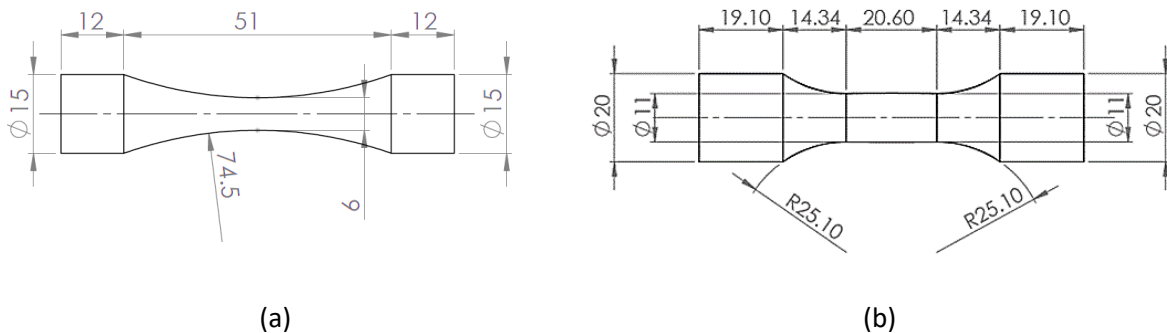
Geometry of the tested specimens (not is scale, dimension in mm): a) hourglass specimen; b) Gaussian specimen.
